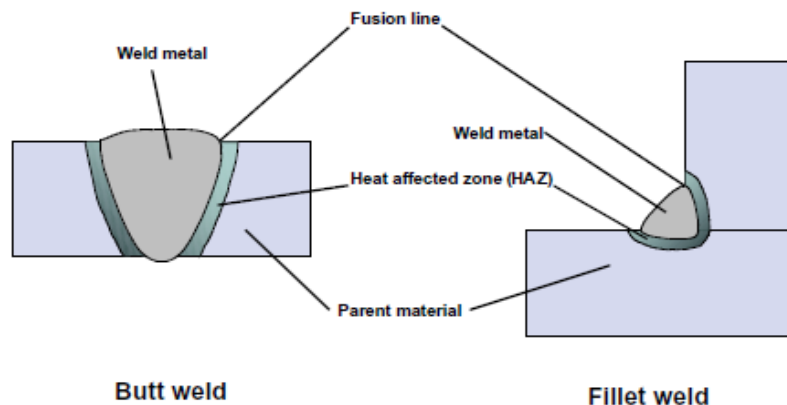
Butt and fillet weld (<https://www.steelconstruction.info/Welding>)
